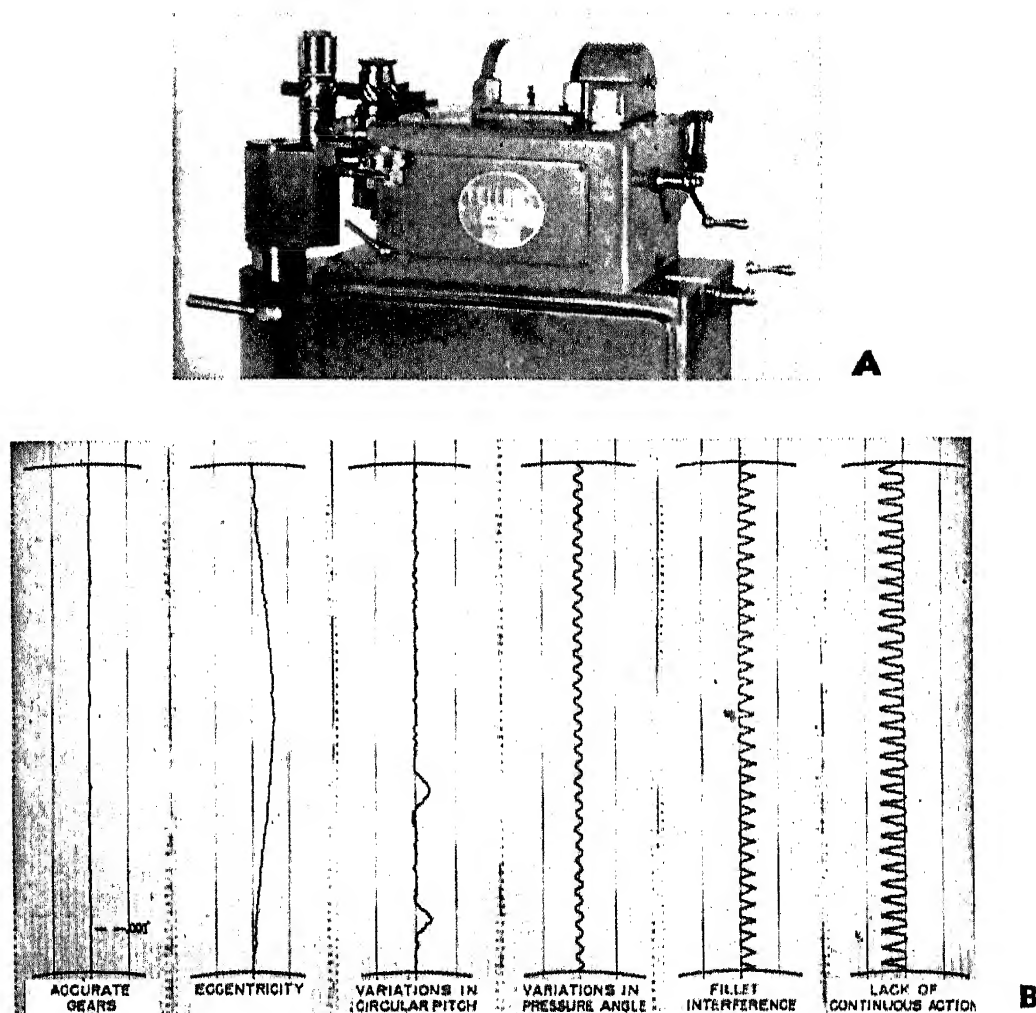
A. A Red Liner gear checker. B. Examples of Red Liner chart indications. (Courtesy The Fellows Gear Shaper Co.)
